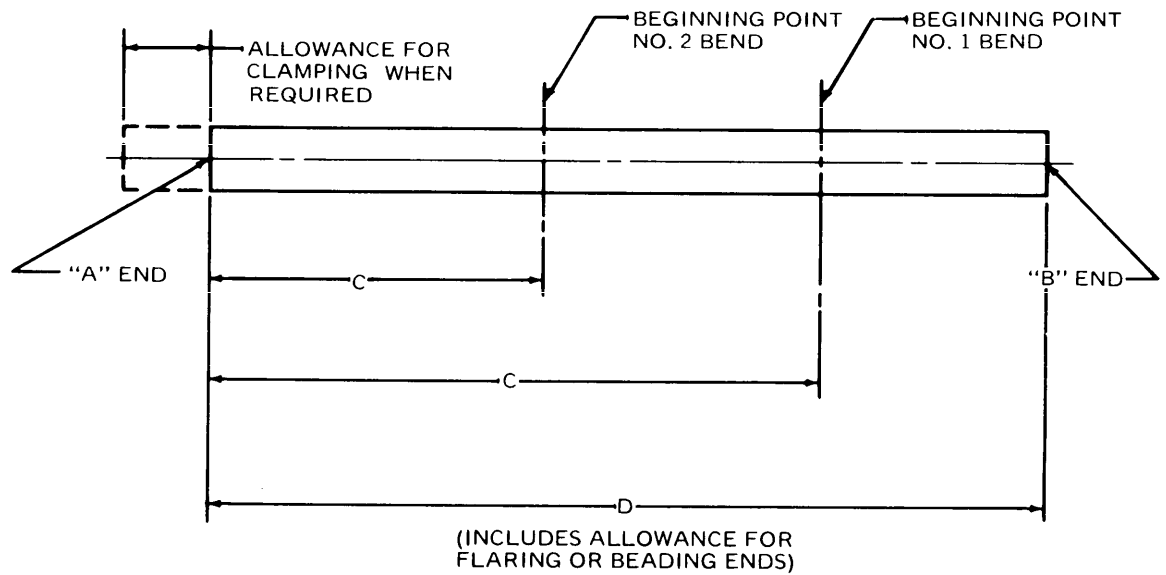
TUBE LAYOUT AND FINISHED ASSEMBLY.
